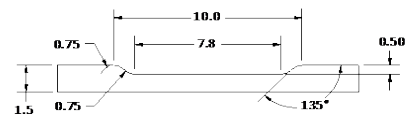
A cross sectional view of the machined pocket used to generate a standoff gap. This feature is machined into the target coupon at the intended weld site.
